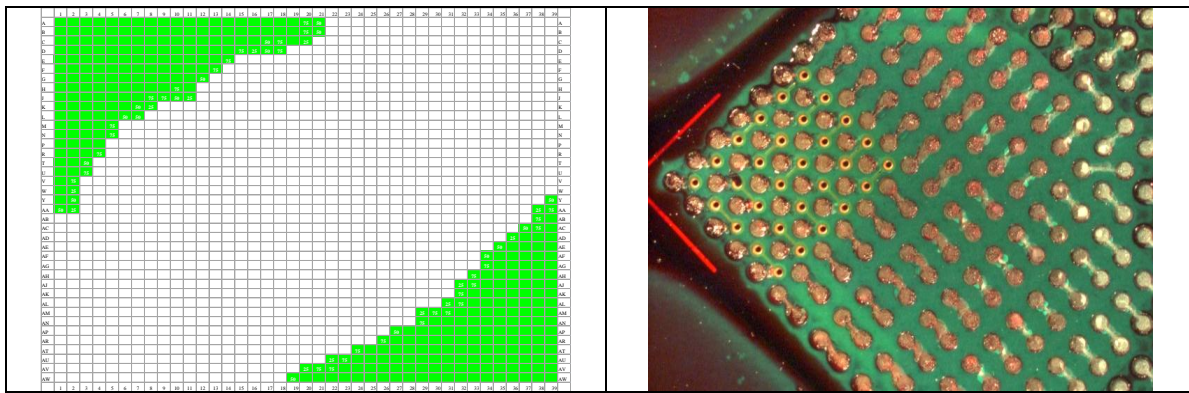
Typical Dye and Pry Result with Full NSMD Pads (Green - PCB Pad Cratering)
